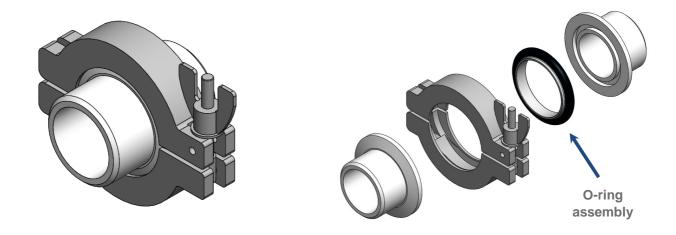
KF flange interface with assembled (left) and exploded view (right)
